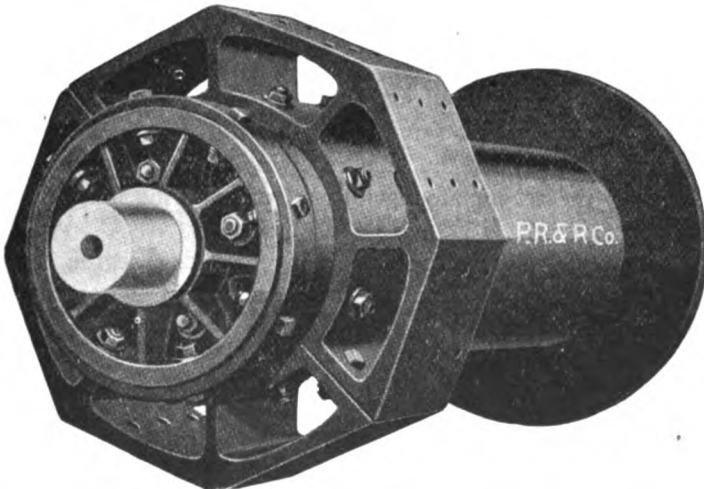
Parkersburg Steel and Wood Calf Wheel Shaft.
